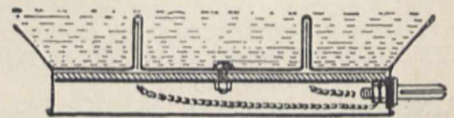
Arrangements of heating elements in Kettle. (Simplex Conduits, Ltd.)
